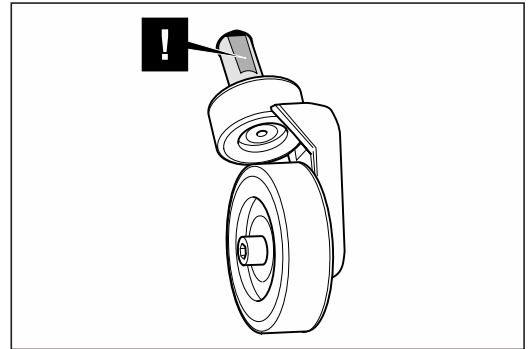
When mounting the complete rear wheel, align the tensioning surface of the tail axle towards the screw in the machine housing.
